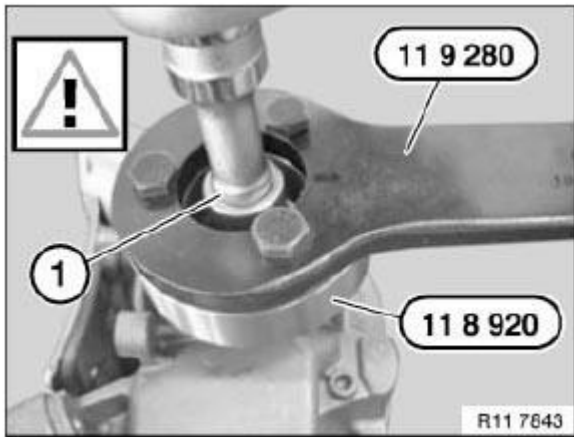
Positioning Special Tool (11 8 920) On Sprocket Wheel
